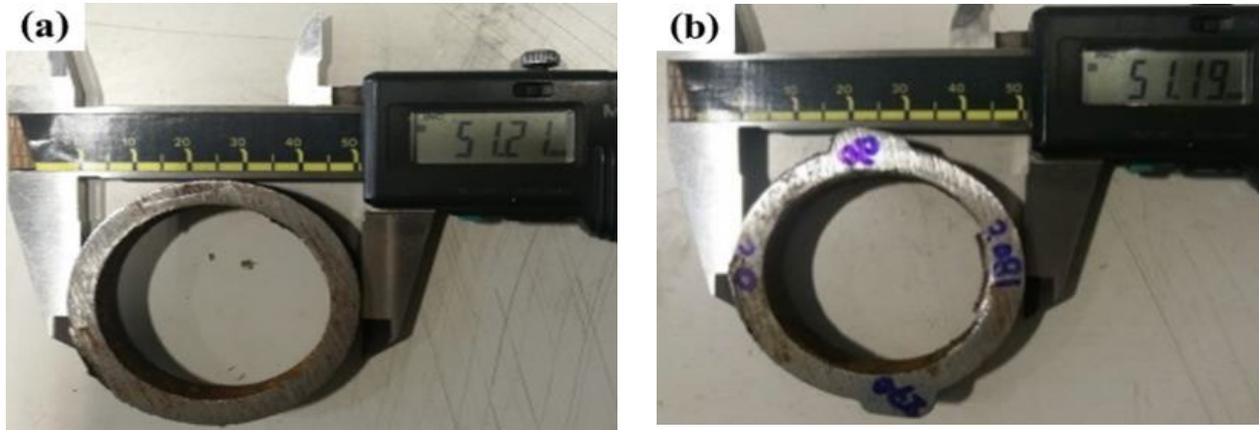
The dimension check at the outside diameter (a) unused tube; (b) used tube
